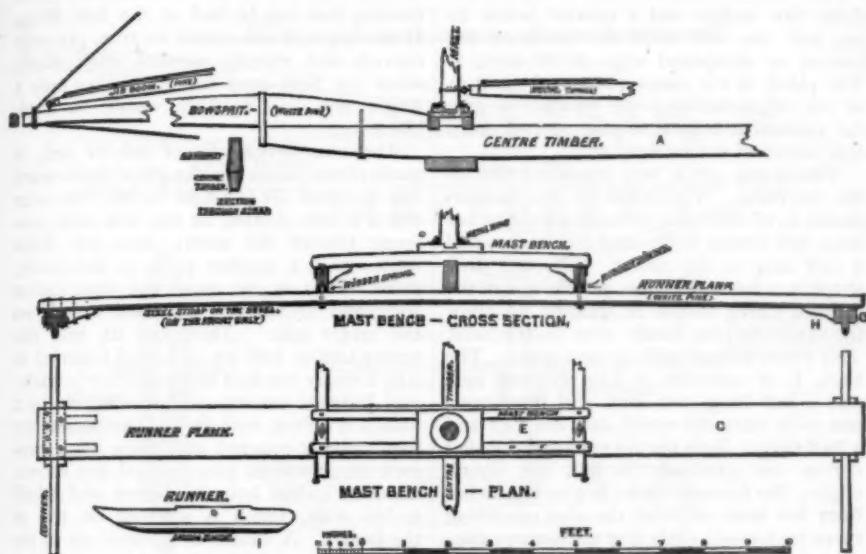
PLAN AND ELEVATION OF MAST-BENCH AND RUNNER-PLANK.
